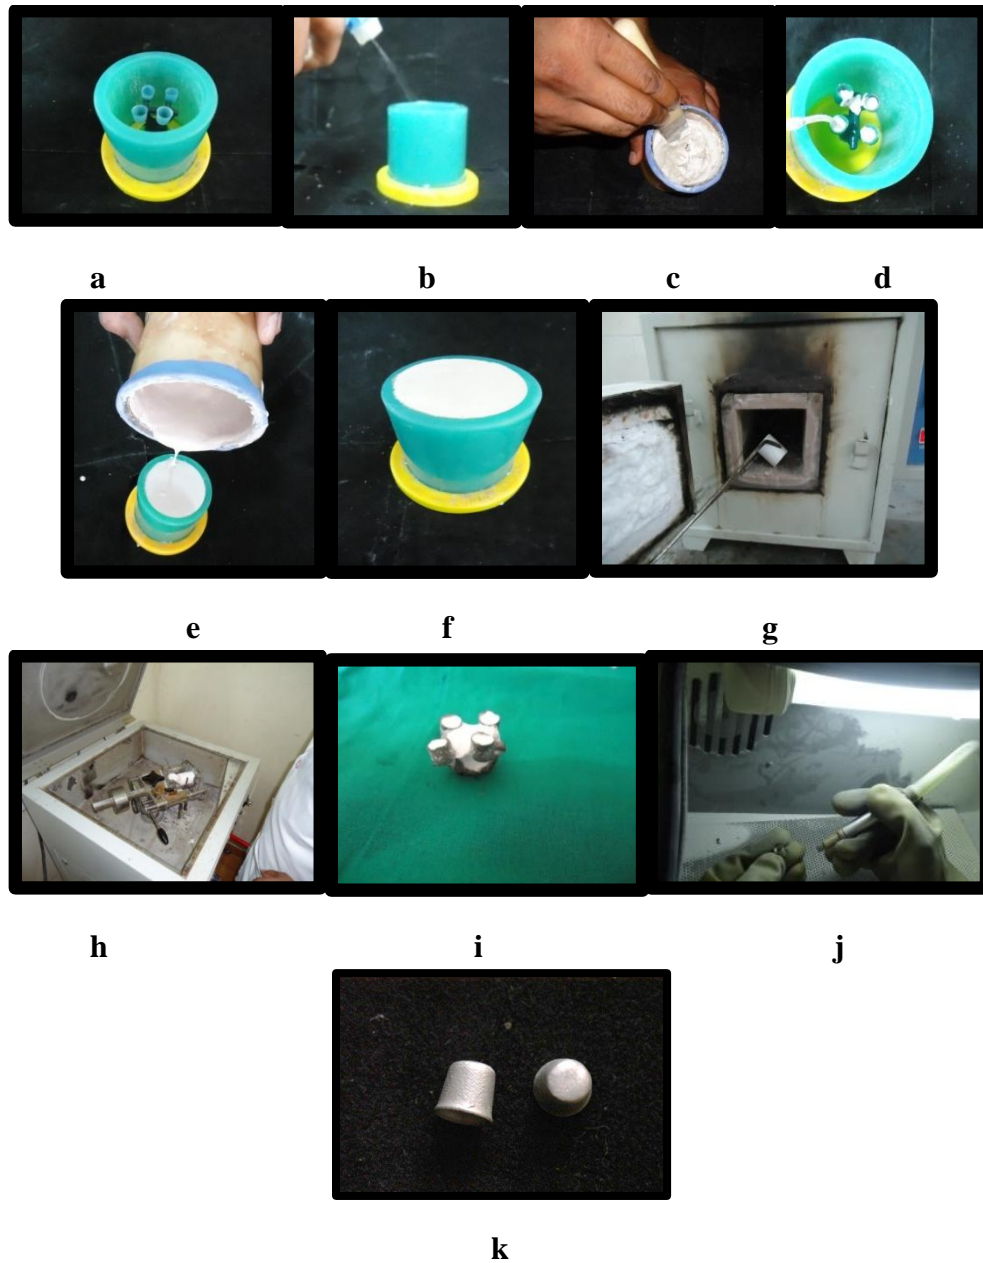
Sprue attachment for 3D printed resin pattern, b) Surfactant spray, c) Mixing of the phosphate bonded investment, d) Painting of the investment over the patterns, e) Filling of siliring with investment, f) Completed investment, g) Burn out after bench set, h) casting i) Divested cast coping, j) Sandblasting of cast coping k) Completed cast coping
